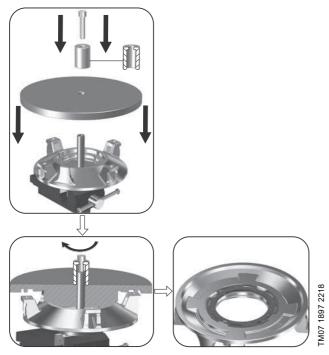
Neck ring, neck-ring retainer and inlet part positioned in service tool L
